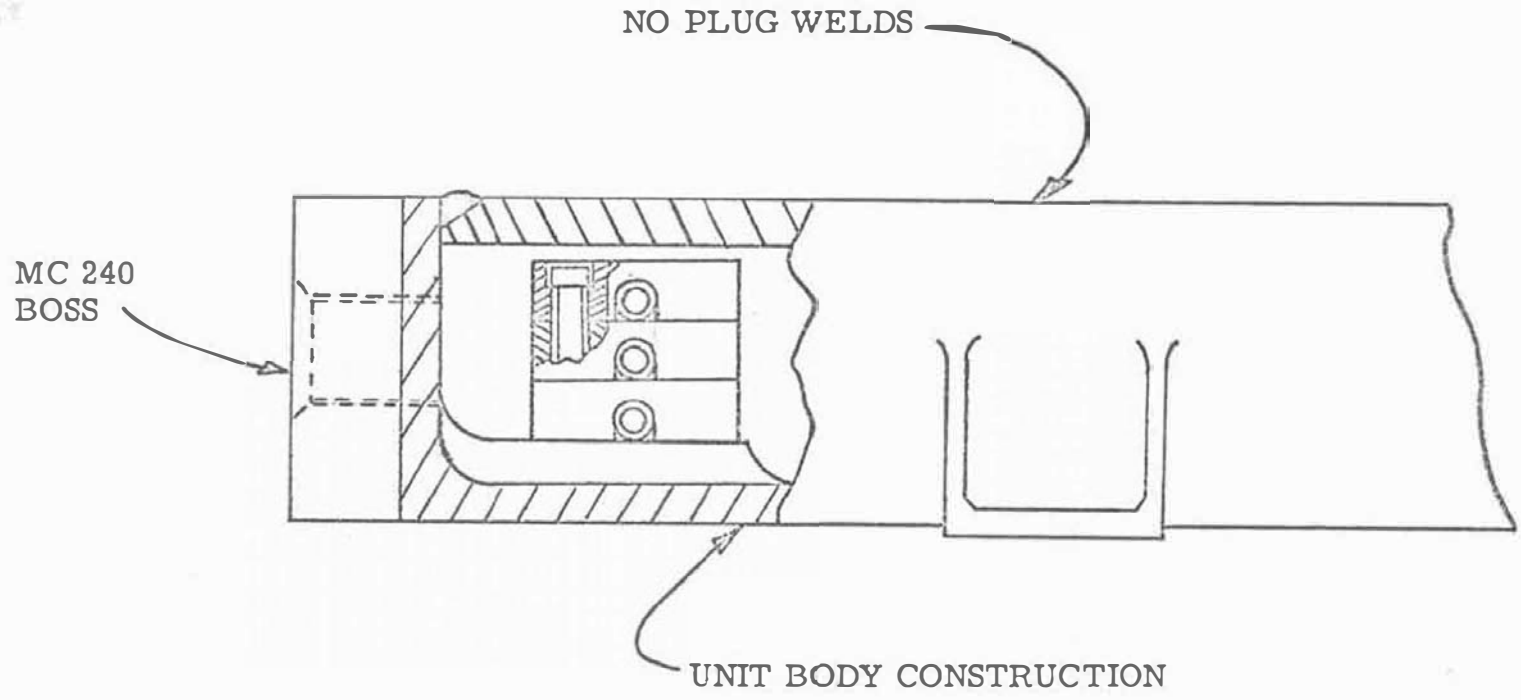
GAS BEARING HEAT EXCHANGER NO WELD DESIGN
